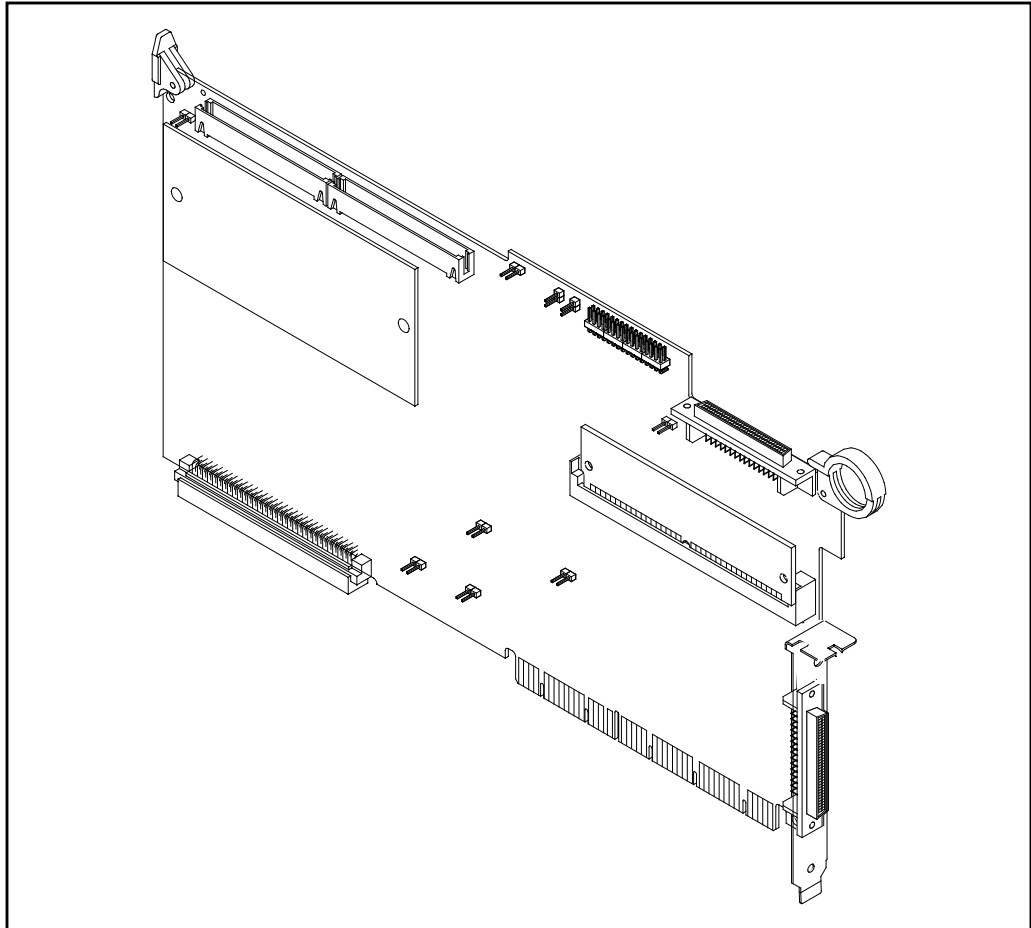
Master Disk Recorder Circuit Board Showing Square-Pin Test Points
